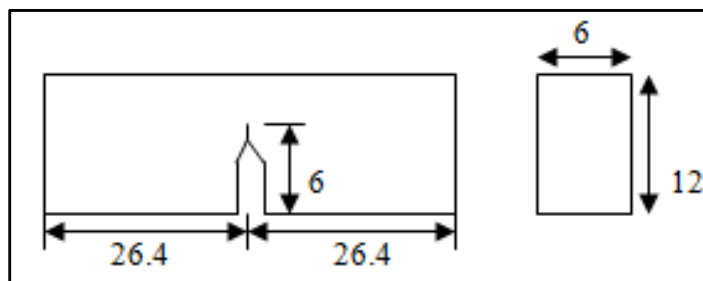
Sample specification of a Single Edge Notch Bend (SENB) specimen, all dimension (in mm)
